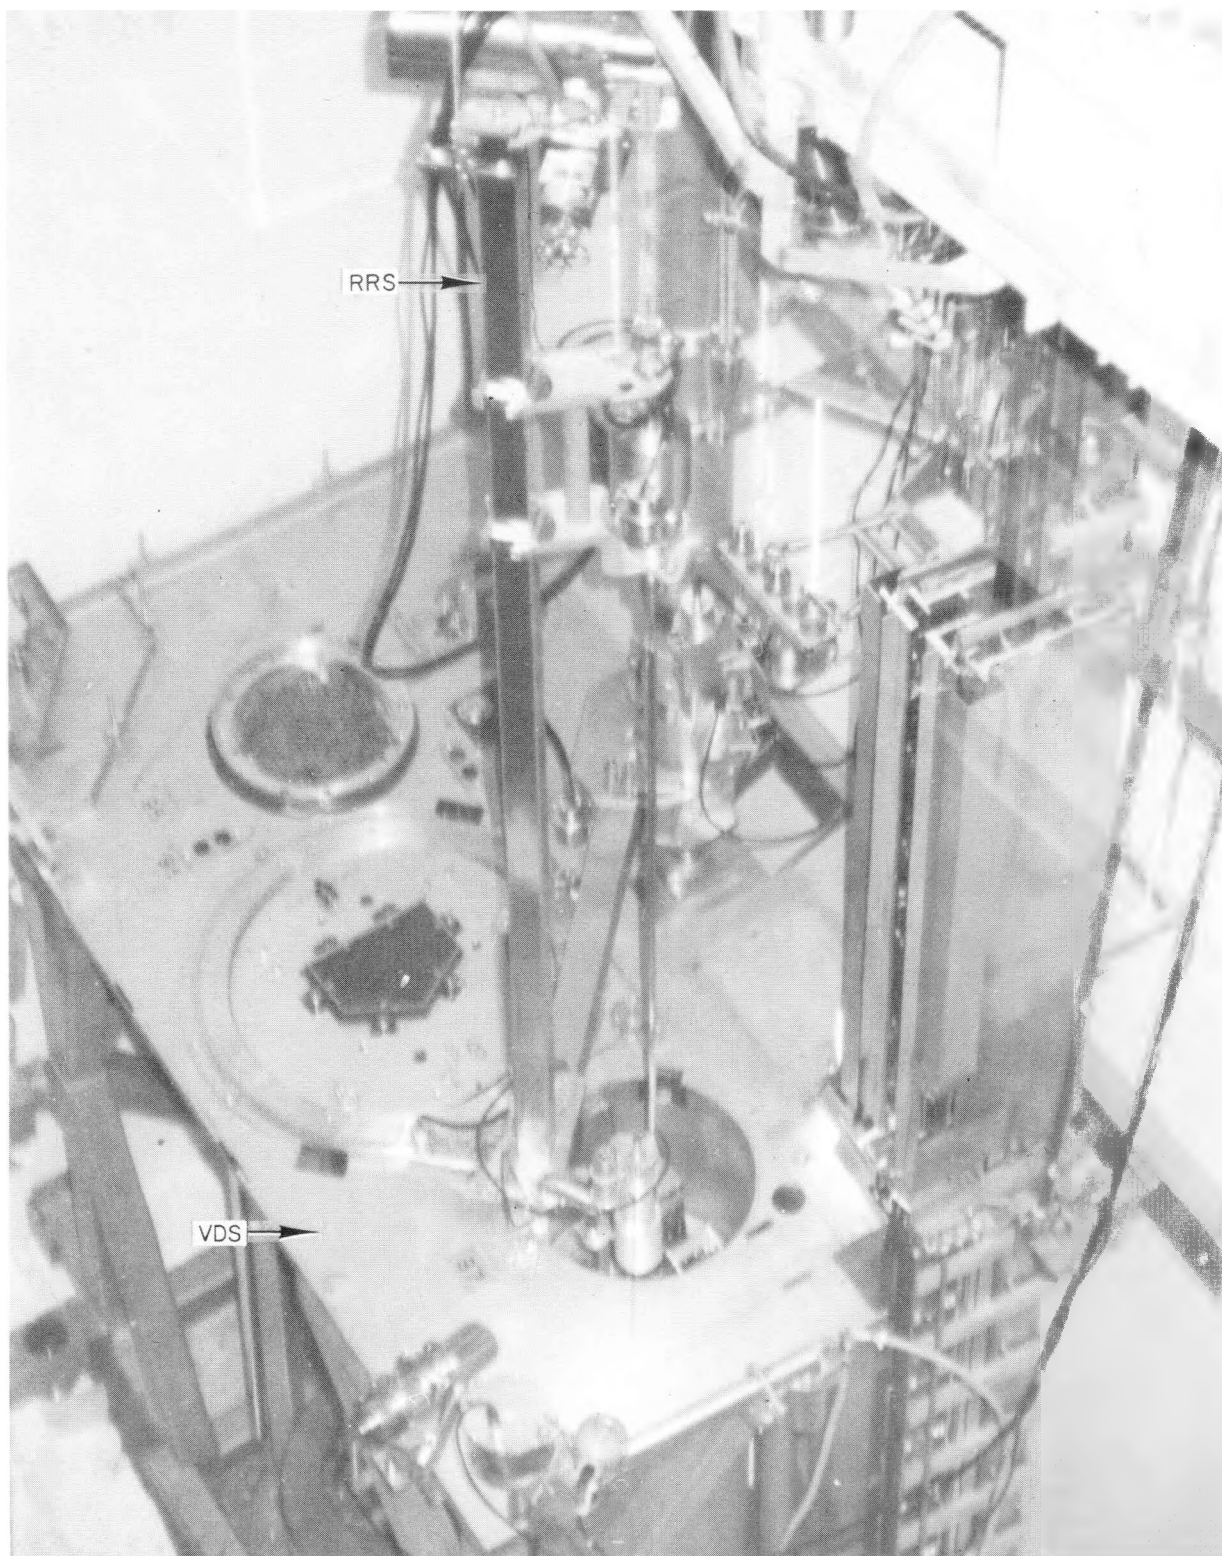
LWBR Rod Removal System and Vertical Disassembly Stand in Operation
